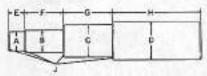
Use a pilot shaft made to dimensions shown when installing clutch assembly in 1690
